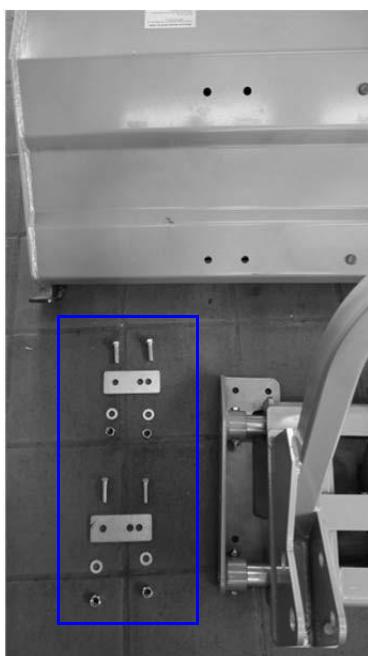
Mounting material for hydraulic lateral shifter, left side
